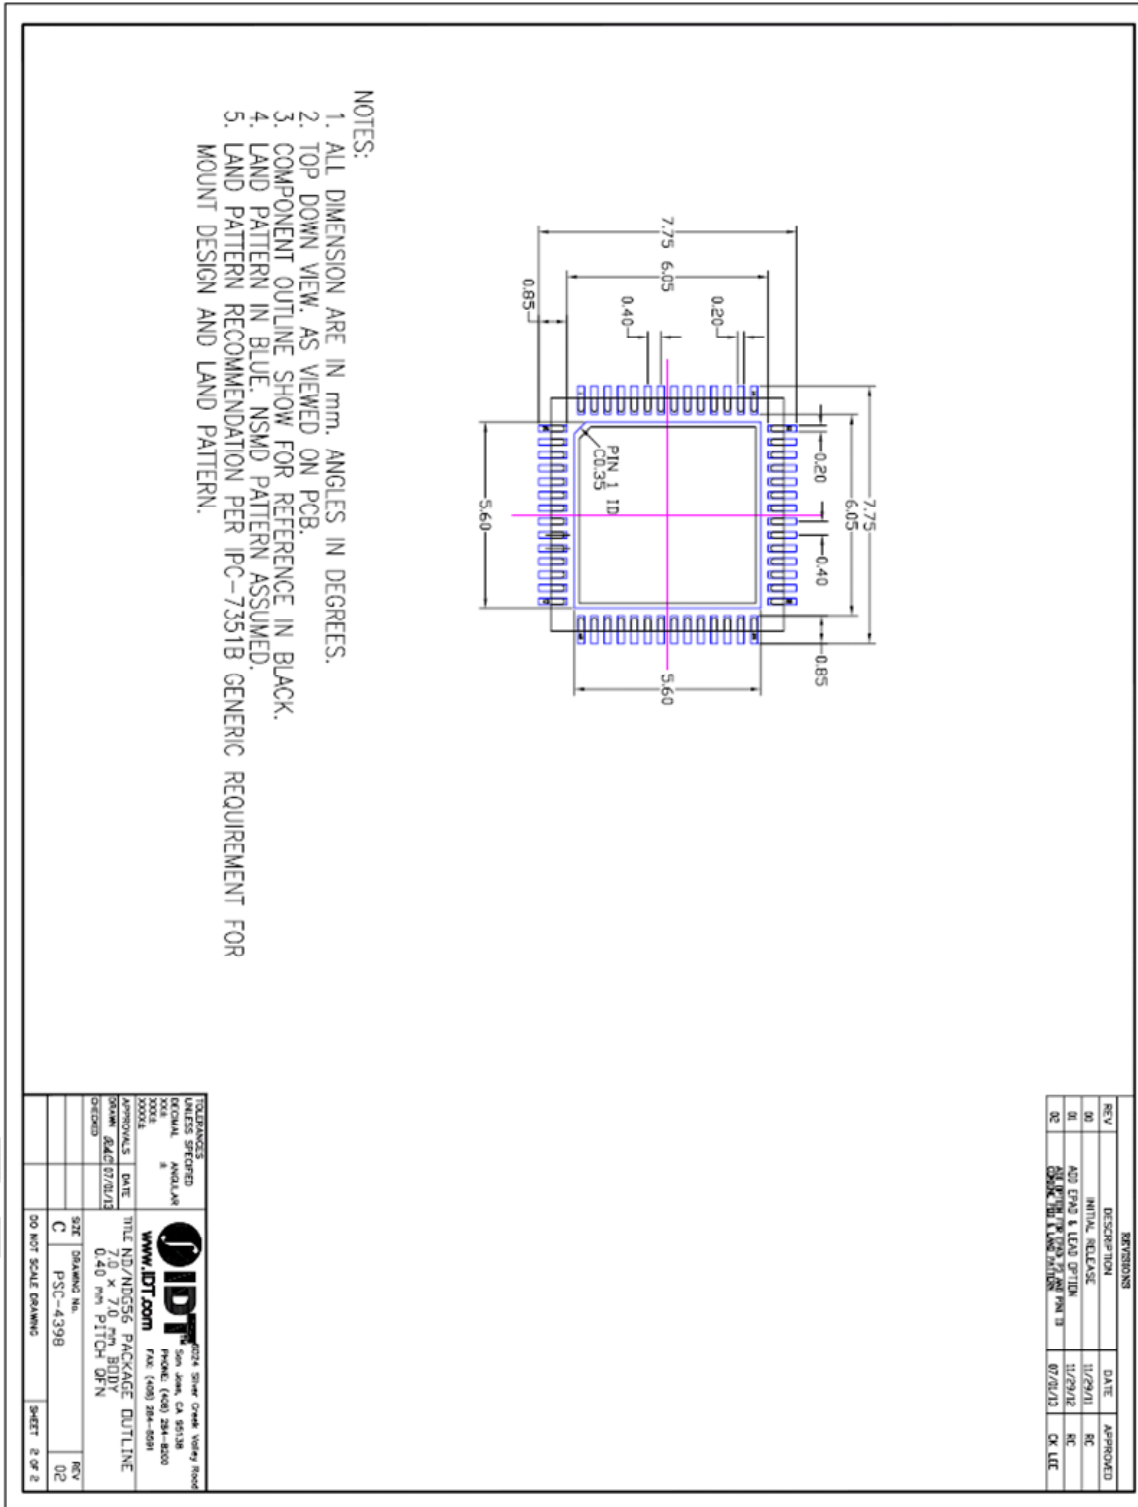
VFQFN-56 7mmx7mm Package Outline Drawing (POD) Page2
